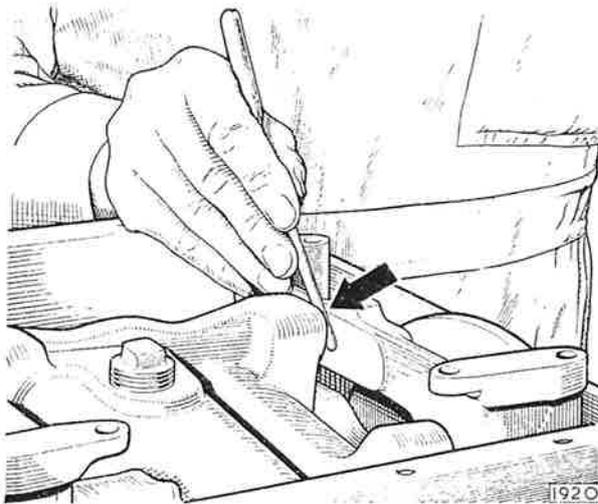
Measuring the clearance between the inner fulcrum mounting bracket and the differential casing
